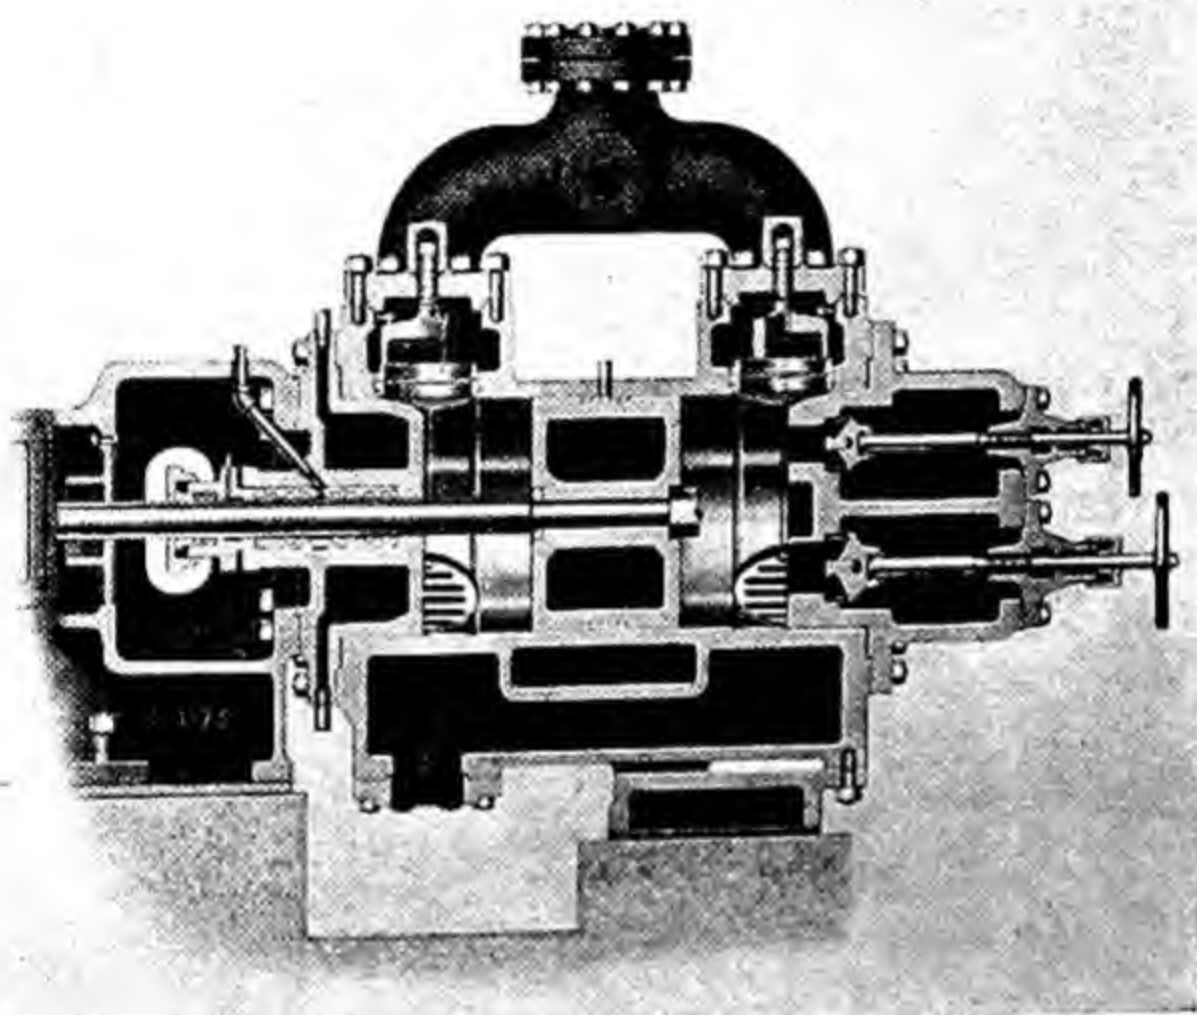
Sectional View Showing Construction of Clearance Pockets.
